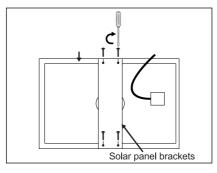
Put the solar panel bracket on the back of the photovoltaic panel, align the holes, and then tighten it with a screwdriver with a 4-head Phillips screw and a flange nut.
